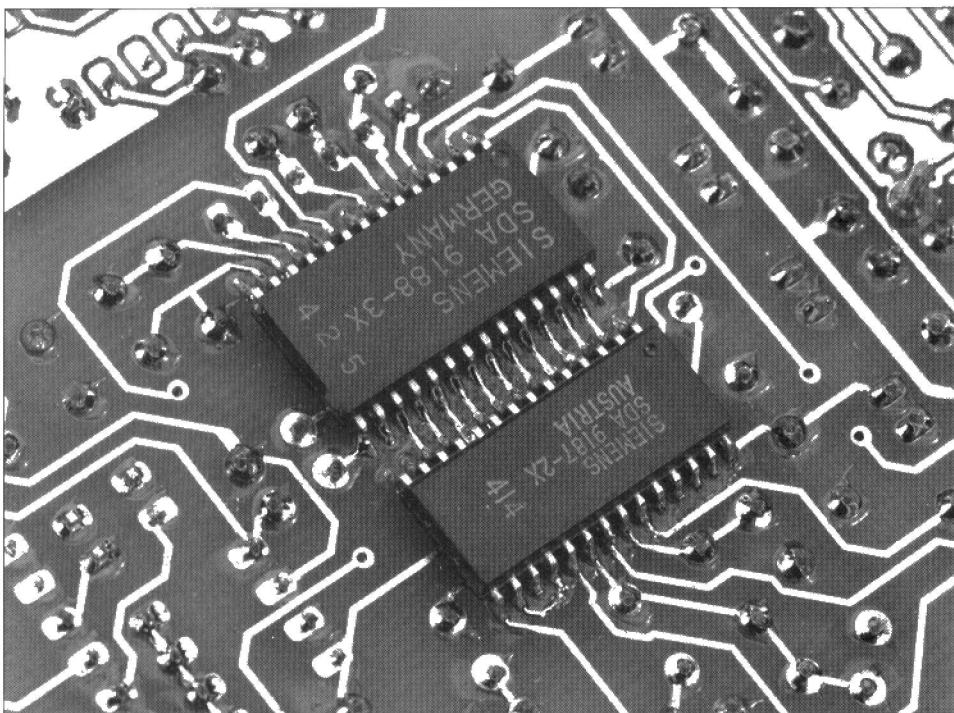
This photograph shows the two PIP core ICs. These are surface-mounted devices (SMDs) which are fitted at the solder side of the board. It goes without saying that a solder iron with a fine tip is needed here. And good eyesight!
